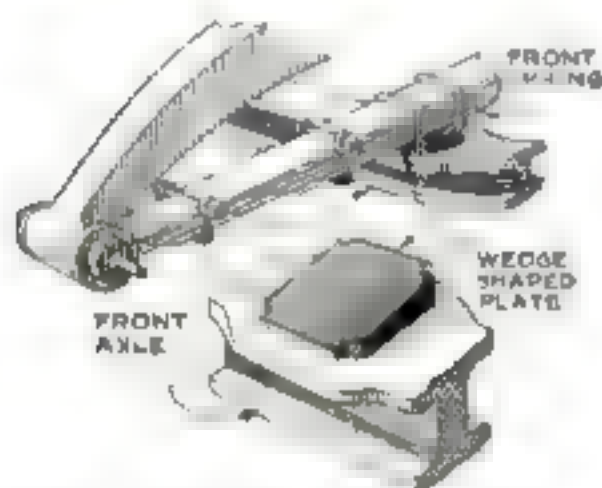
Metal wedge, bolted between spring and spring seat on axle, will improve steering.
